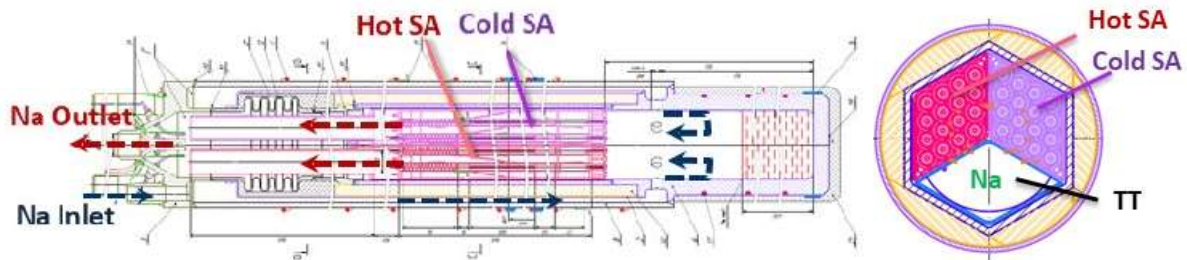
Cross-sectional schematic view of the SAIGA multiassembly test: axial (on the left) and radial (on the right) views [3].
